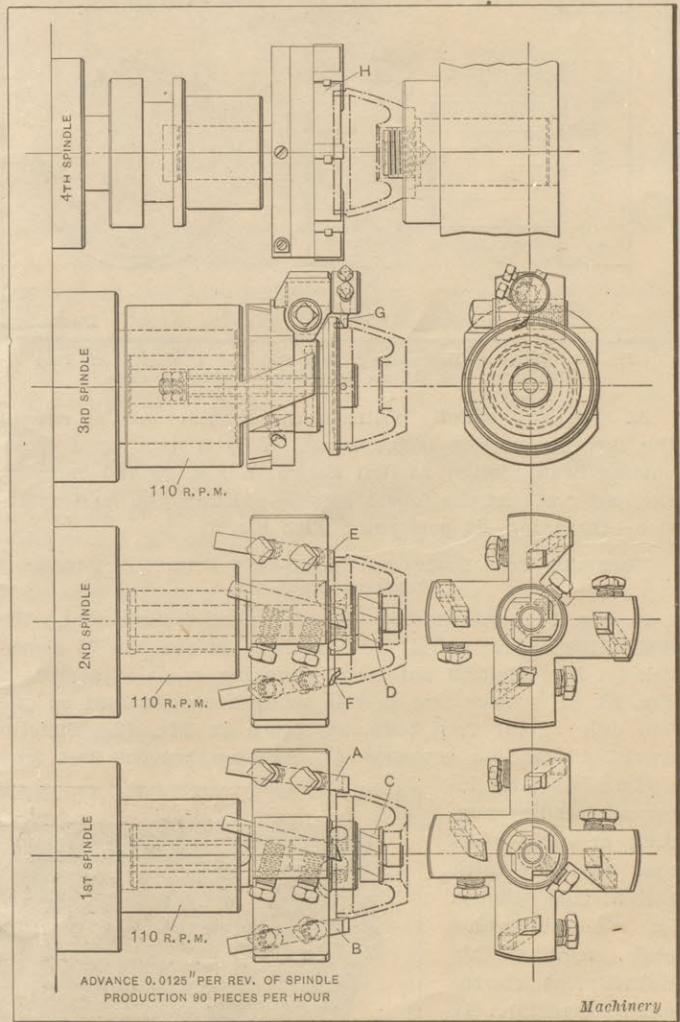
Second Series of Operations on Shrapnel Head on the New Britain Automatic Chucking Machine
